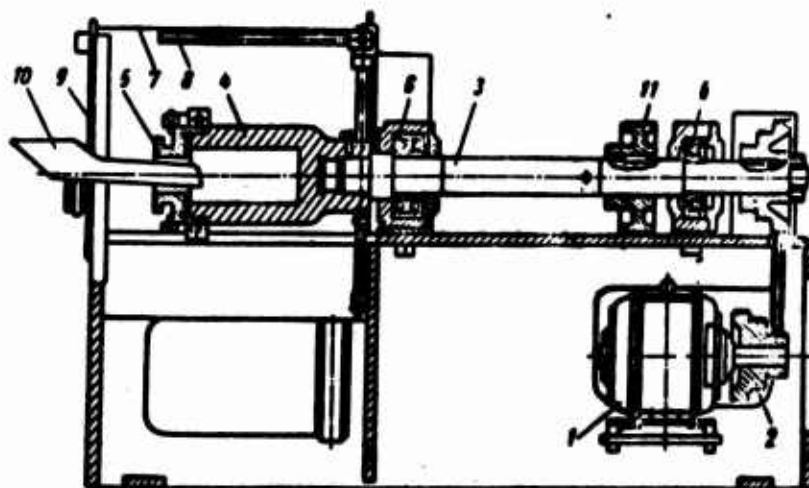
Centrifugal machine with horizontal axis of rotation: 1 - electric motor; 2 - pulleys; 3 - shaft; 4 - metallic mold; 5 - cover; 6 - ballbearings; 7 - housing; 8 - tube; 9 - door; 10 - groove; 11 - braking pulley.
